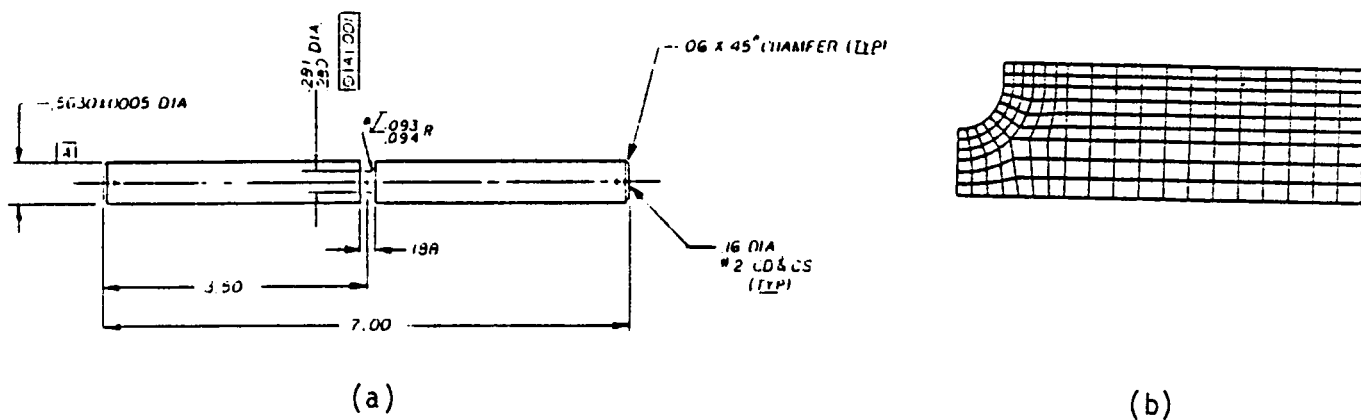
BENCHMARK NOTCH SPECIMEN: (a) SPECIMEN DESIGN WITH DIMENSIONS IN INCHES, AND (b) FINITE-ELEMENT MECH
